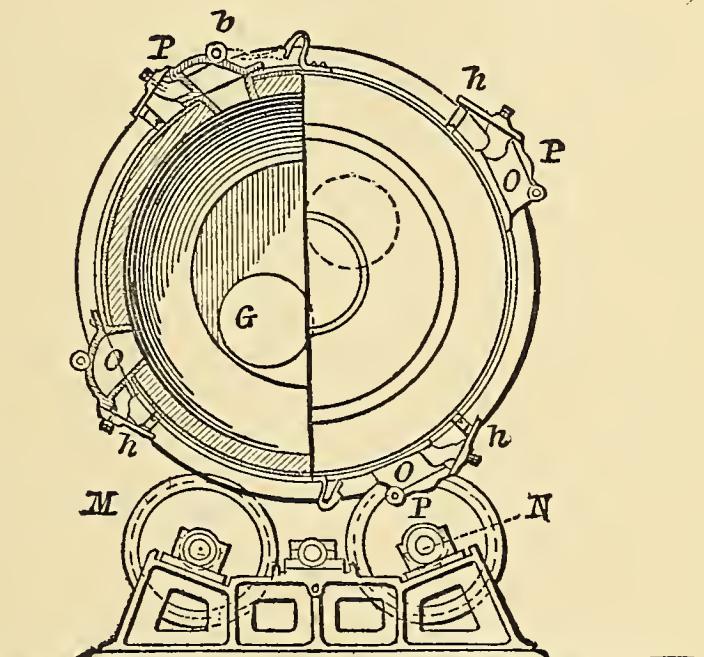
END ELEVATION OF BRUCKNER FURNACE.
